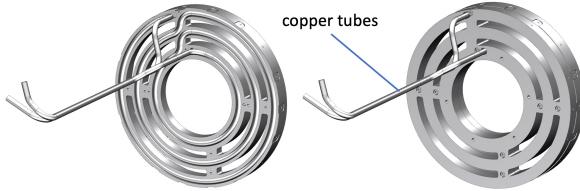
Copper tubing lines brazed to the copper cold plate (left) and the fully assembled cold plate (right).
